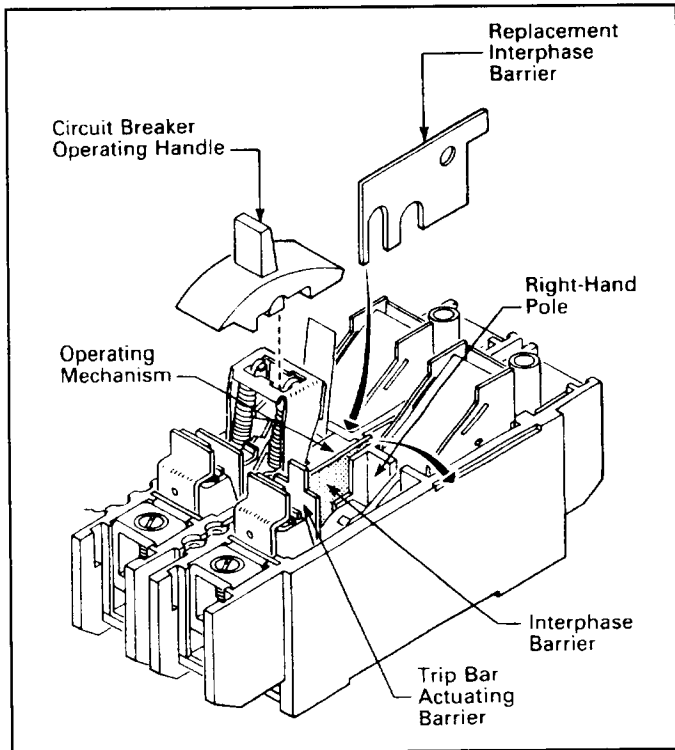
Circuit Breaker Base Assembly with Cover Removed. Replacement of Right-Hand Interphase Barrier
